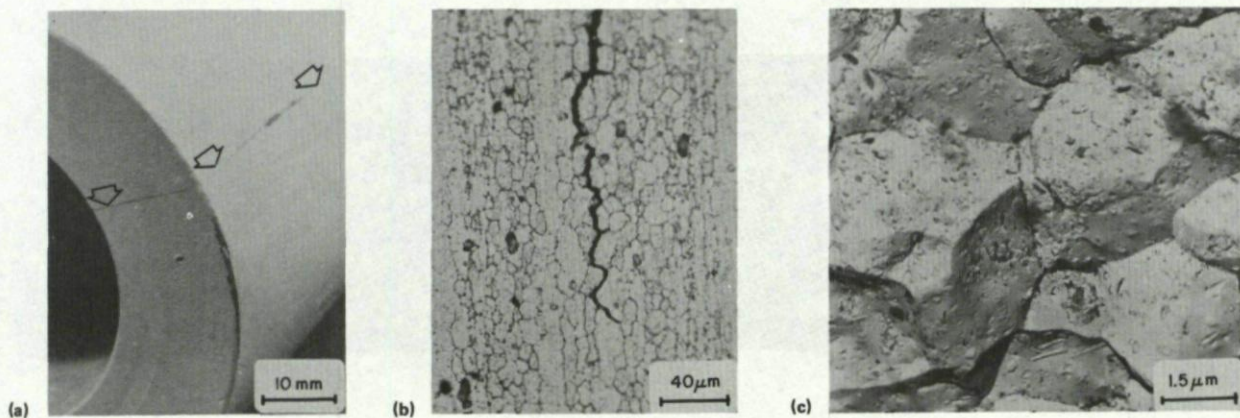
Stress corrosion cracking in a 7079-T6 bearing housing, case history 13-3.
